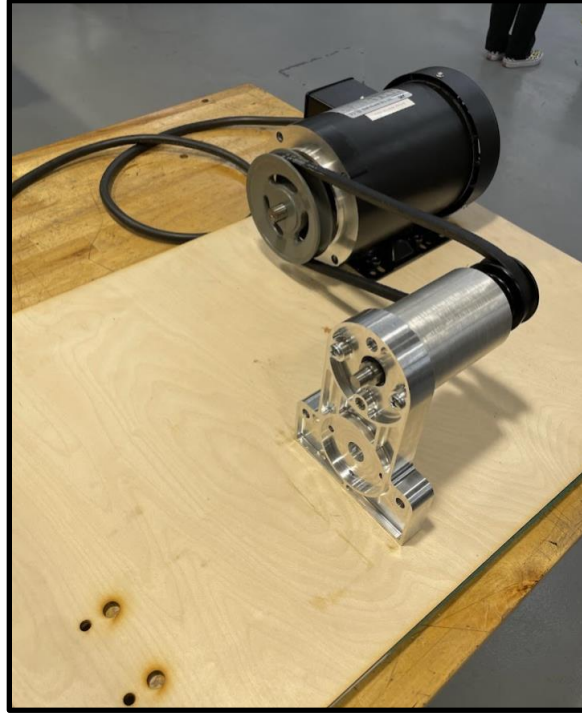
Isometric view of the physical motor and head cap on the mounting platform.
